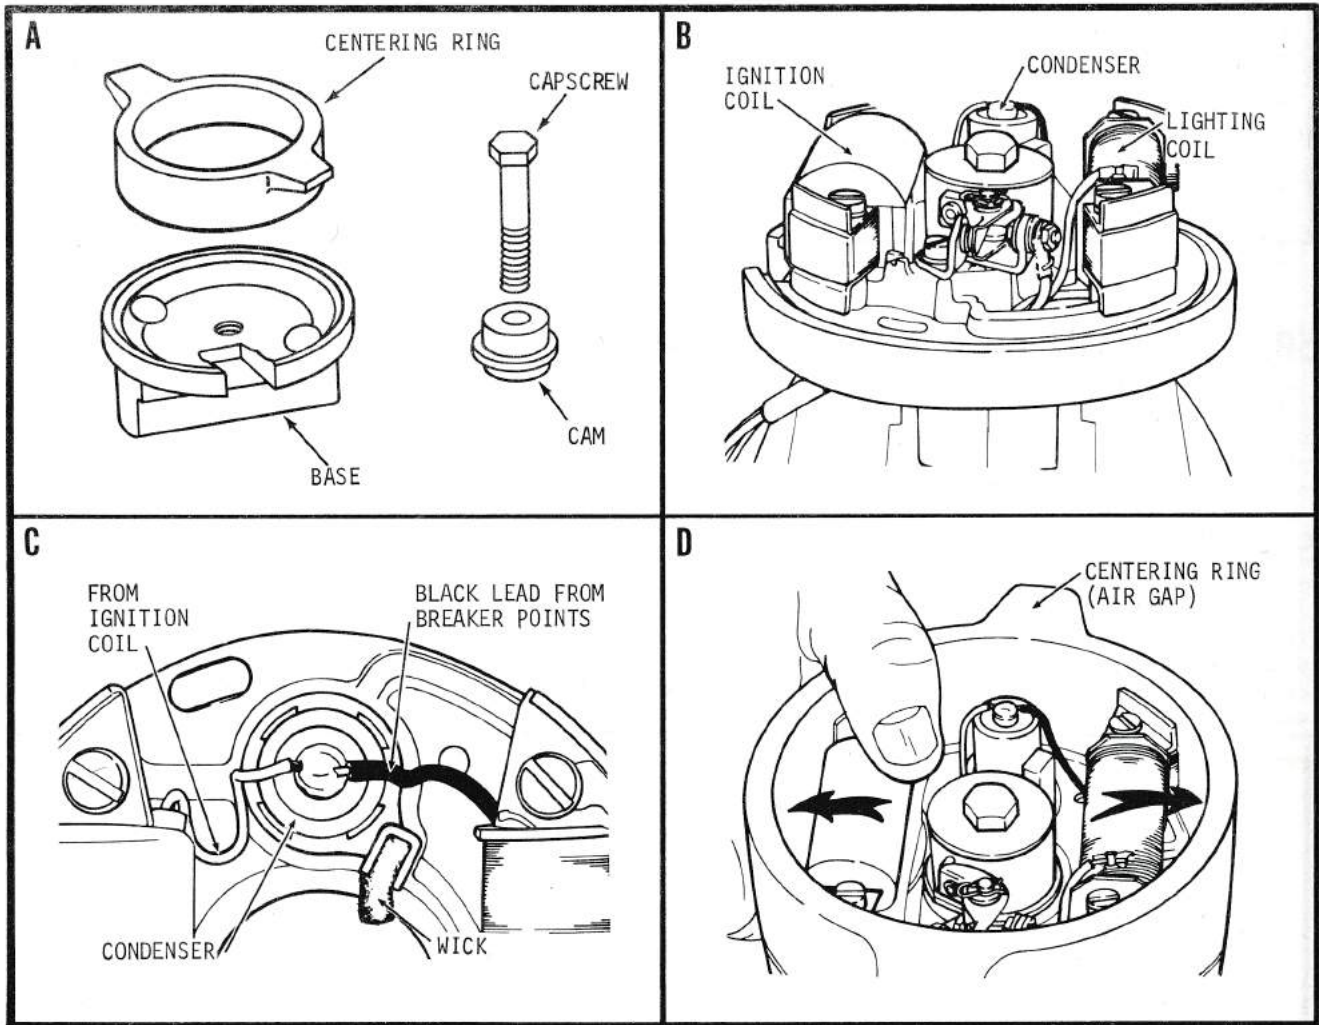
(A) IGNITION TOOL COMPONENTS (B) STATOR MOUNTED IN BASE
